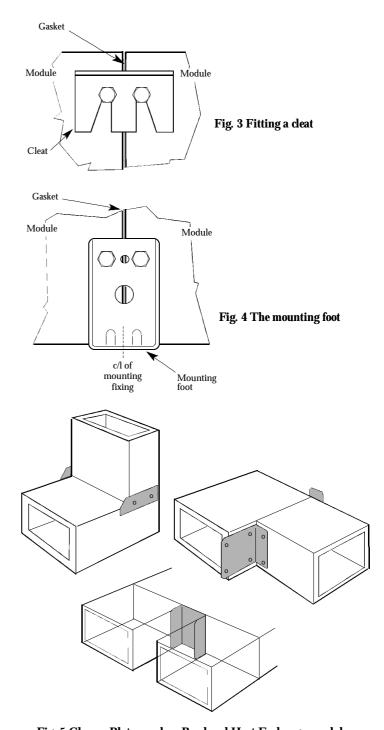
Closure Plates used on Bend and Heat Exchanger modules.
